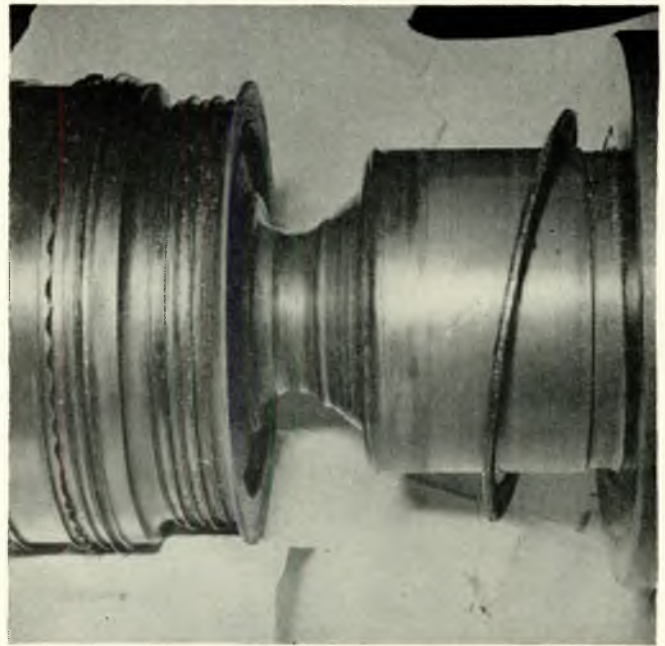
H.P. rotor shaft worn through carbonization in labyrinth box
